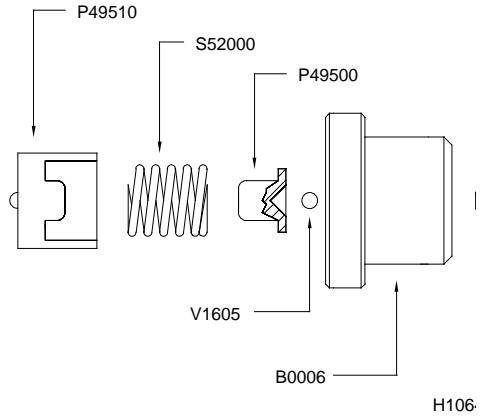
Assembly of Air Loaded and Spring Loaded Pistons
